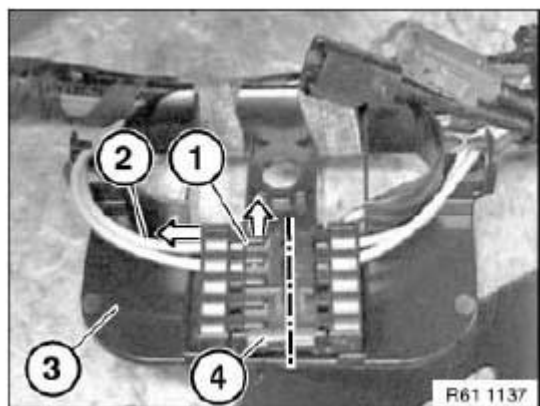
Identifying Feed Fibre-Optic Cable And Connector
